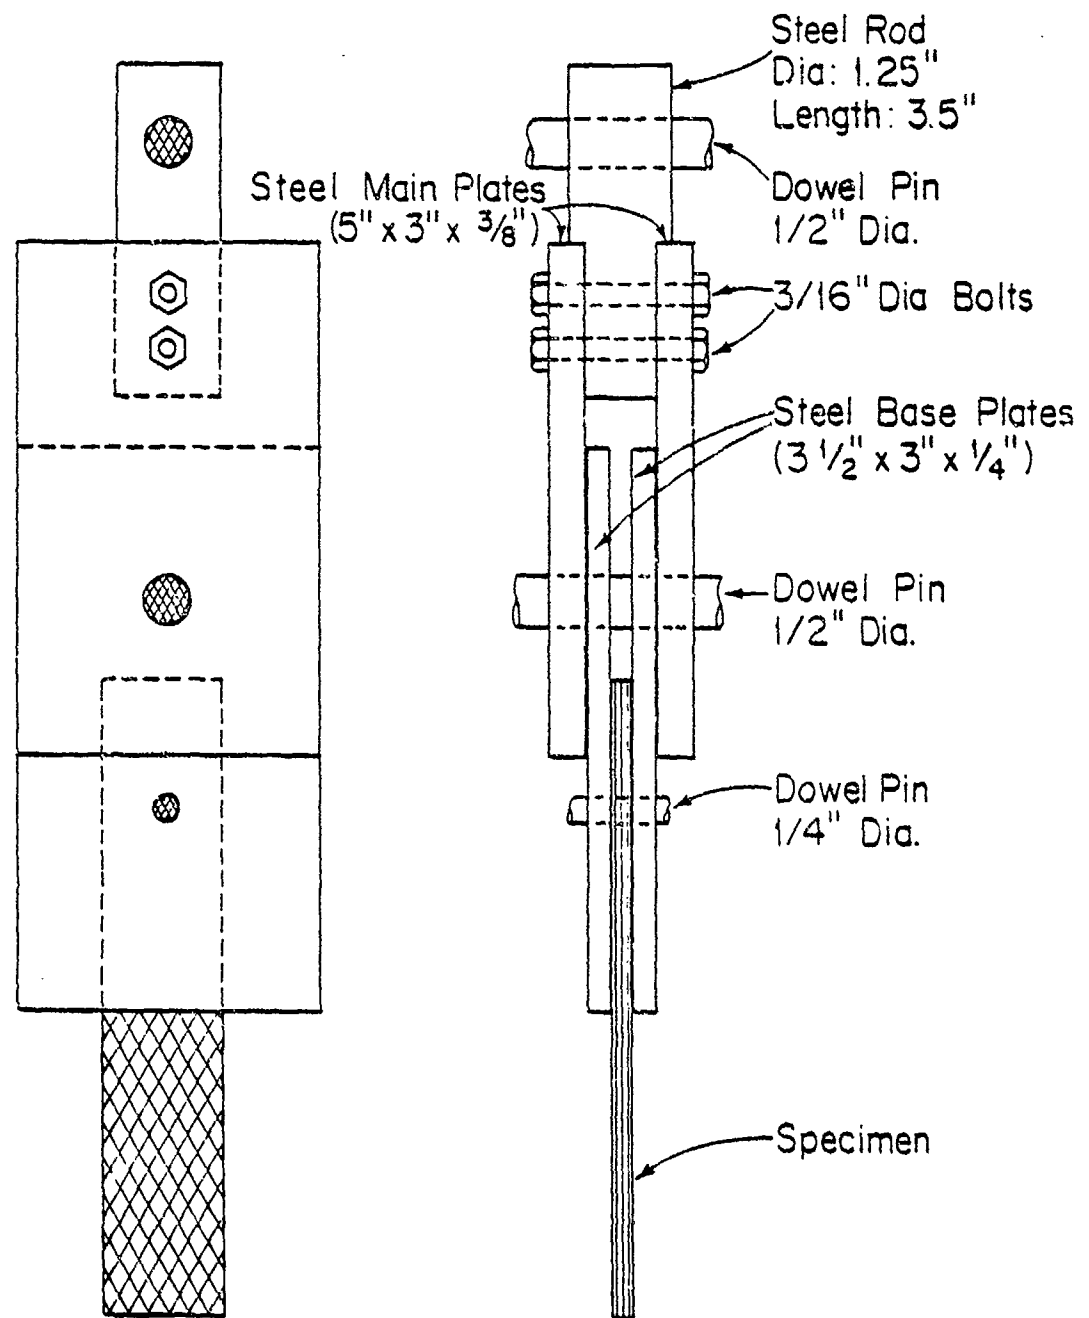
Fixture Used in Testing Loaded Holes (Base Plate Geometry Given in Figure 18 and Table 2.).
